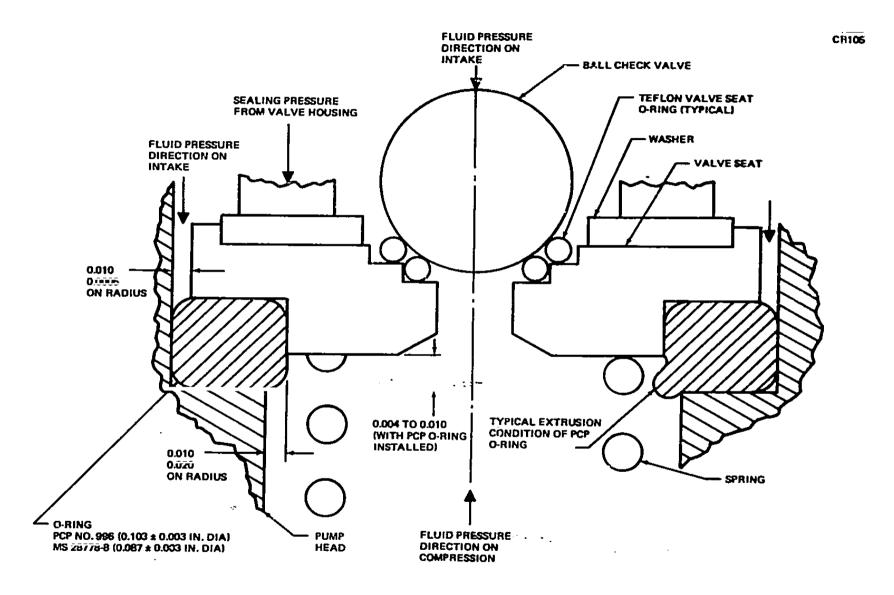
Assembly of PCP Pump (P3) Outlet Check Valve
